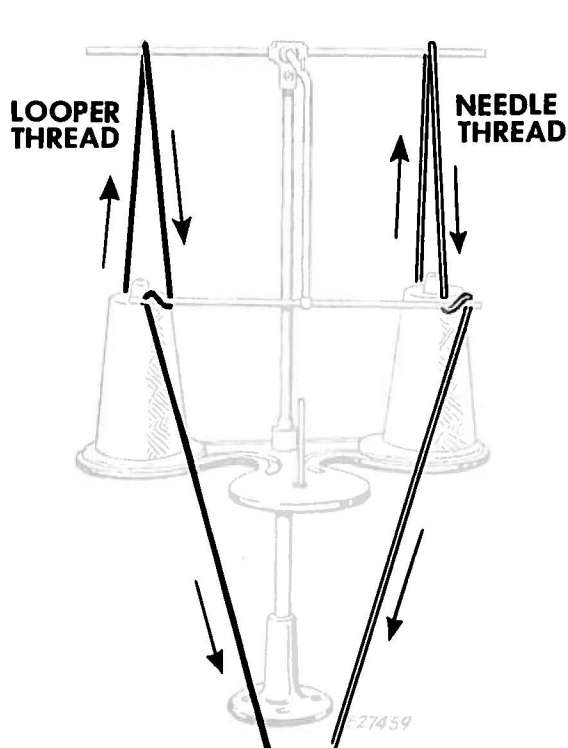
Unwinder 151031 Threaded for Two-Thread Stitch
